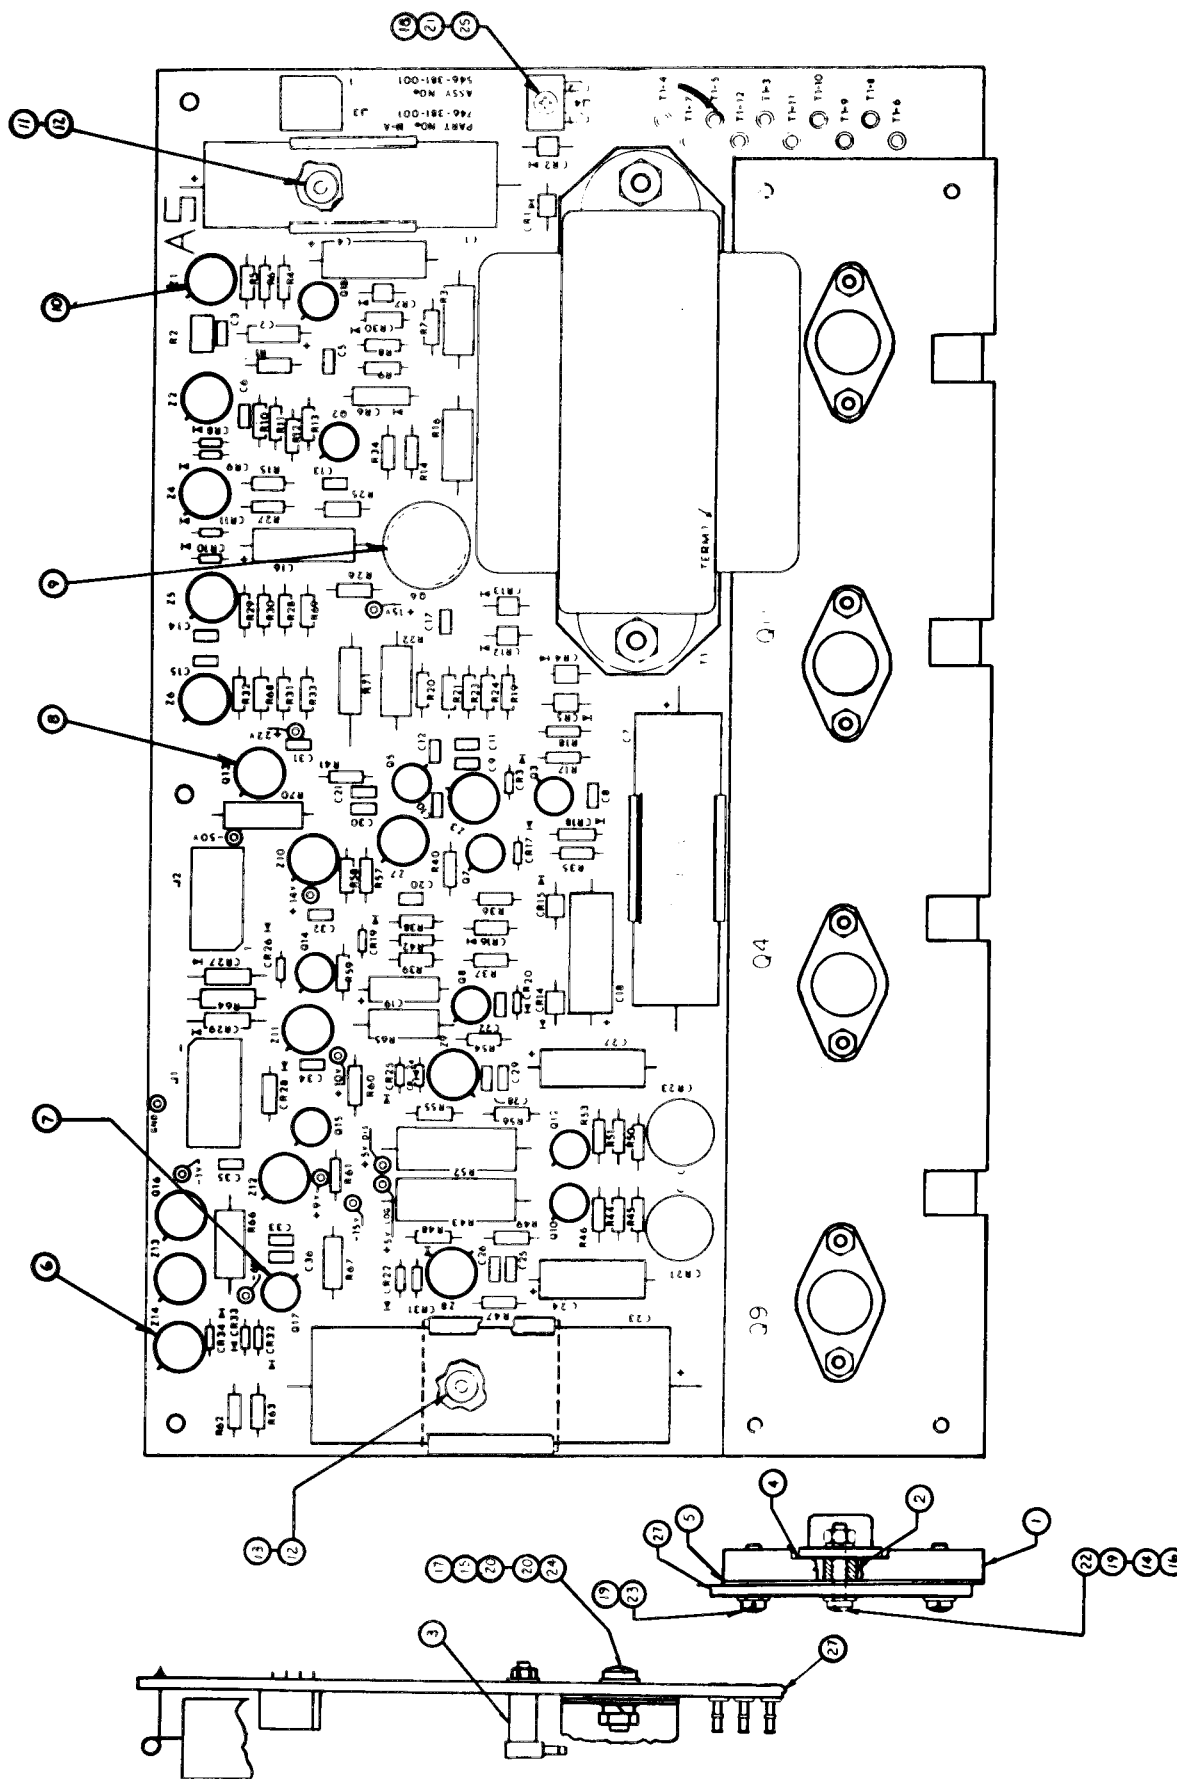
Power Supply P. C. Board A 5 (Sheet 1 of 2)
